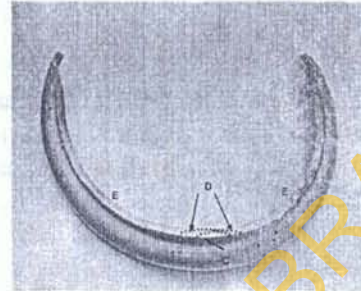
View of the fractured surface of the wheel flange showing regions C, D and E [3].
